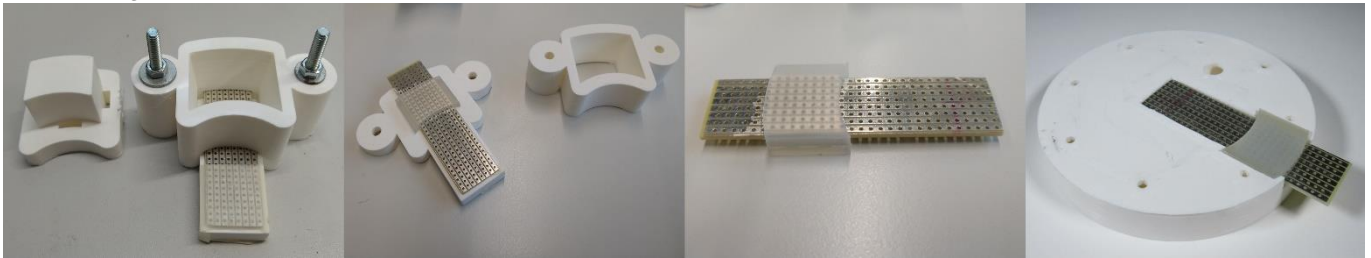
Mold with PCB board enclosed as insert; mold with component after molding; PCB board with insert molded silicon enclosure; PCB board fitted in base plate
